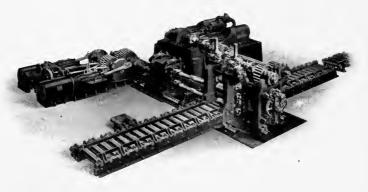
Slabbing Mill at Bethlehem Steel Works. (Mesta Machine Co.)
